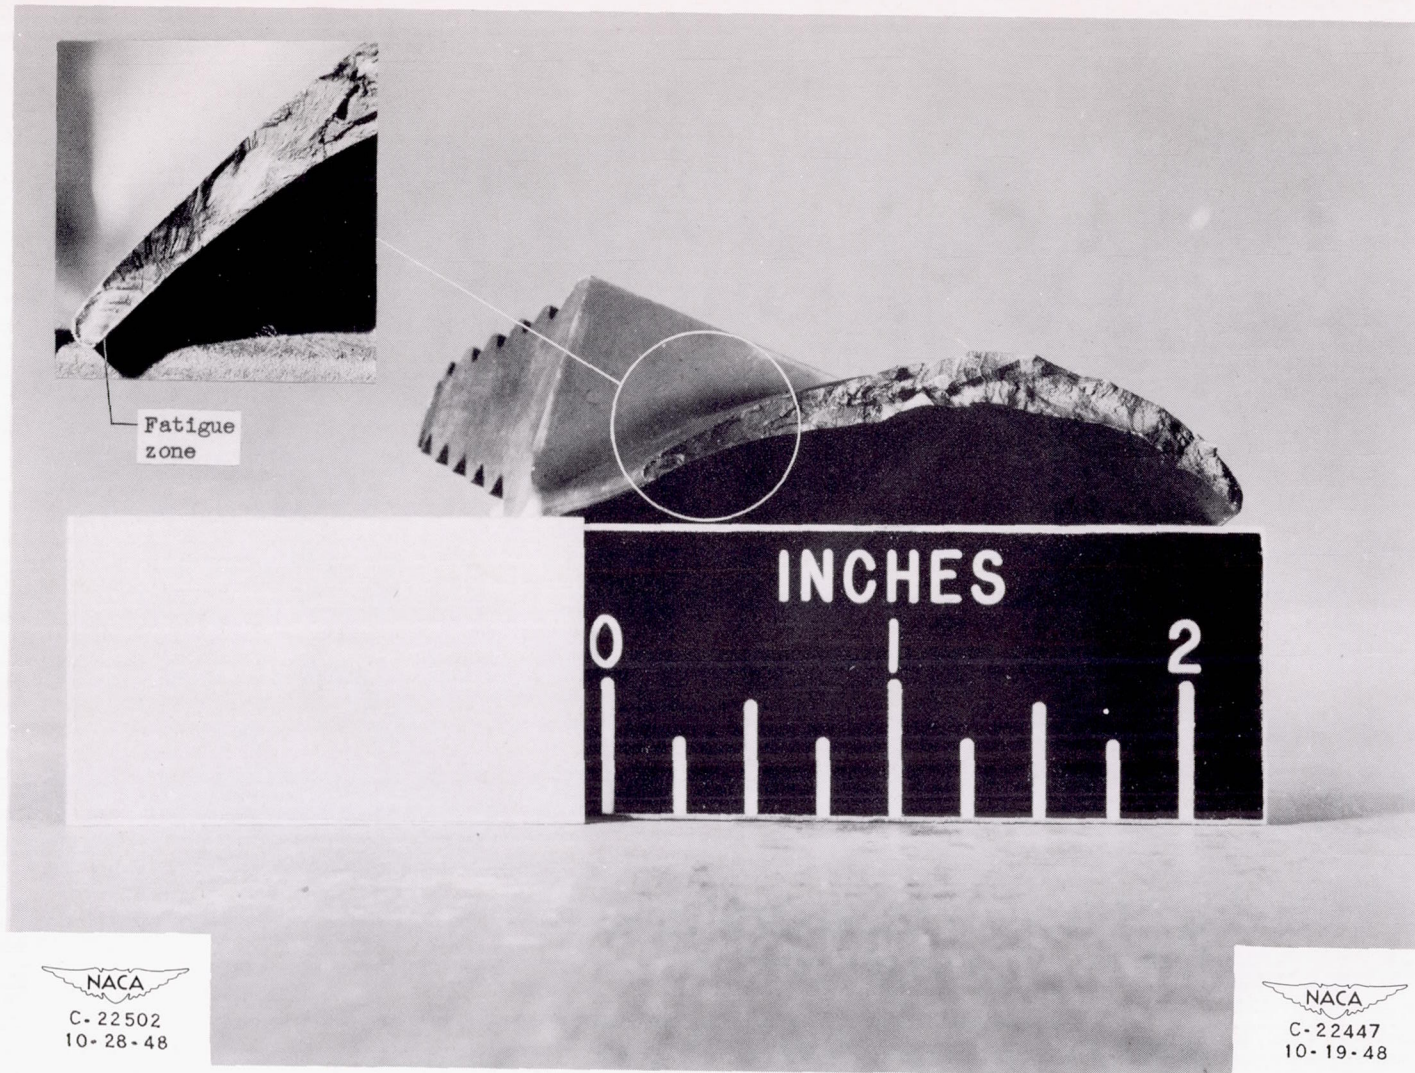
Fracture surface of fractured blade, X2. Insert shows trailing-edge section, X4. Note fatigue-type fracture starting at edge of blade.
